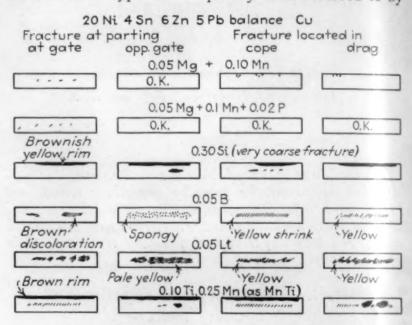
Appearance of Fractures of Bushings Treated with Various Deoxidizers.
